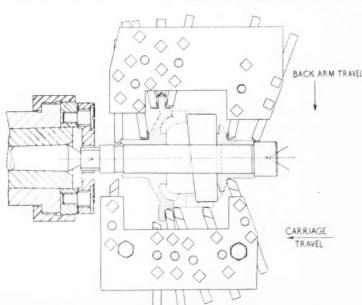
Rough turning single piece differential case on Fay automatic lathe
